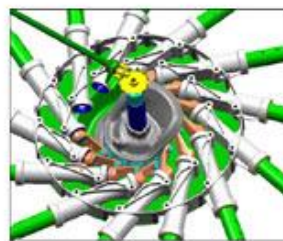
Bearing housing of the swathe tine arms made of die cast aluminum
